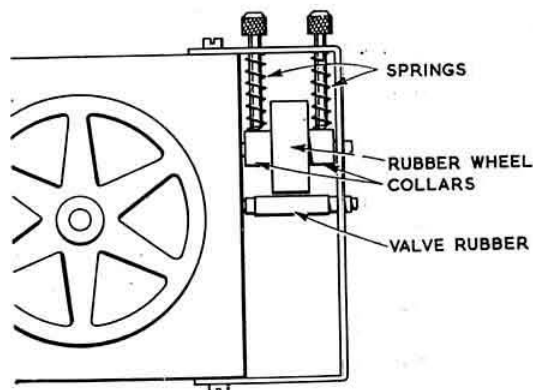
Arrangement of the compression springs to hold the collars straight and the paper under pressure.
